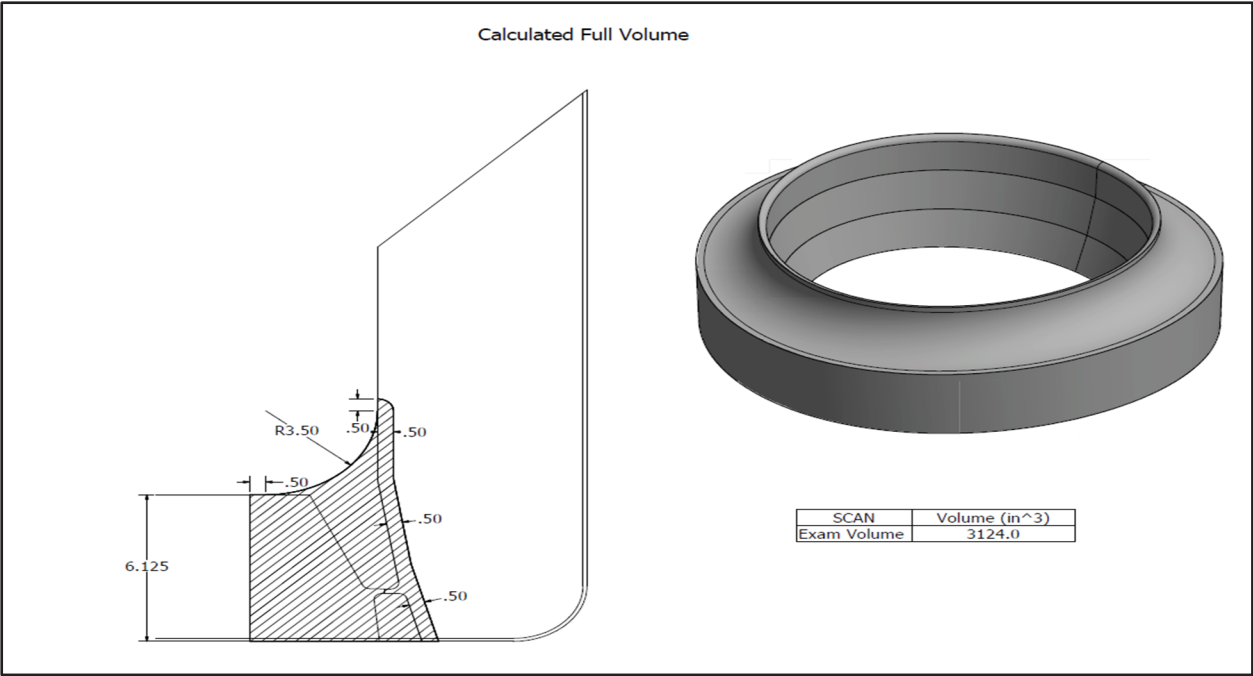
Weld N2D-NV, Required Exam Full Volume Coverage
